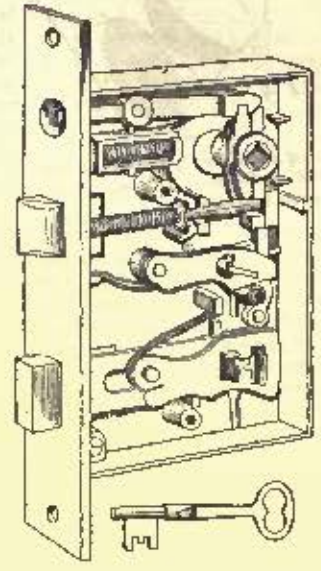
Front-Door Lock. Hopkins & Dickinson Mfg. Co.
